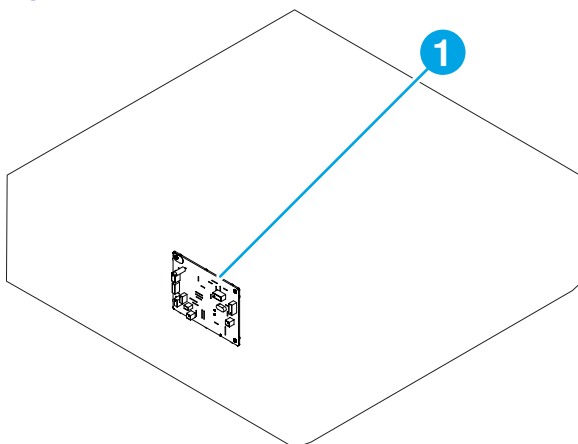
Major assemblies (550-sheet paper feeder; 2 of 2)
